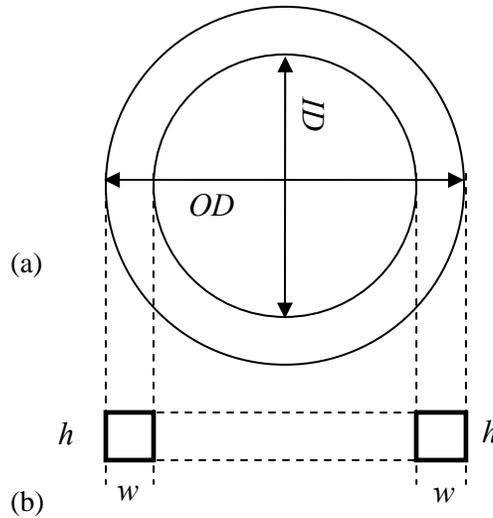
Geometry of toroidal core. (a) Top view, (b) cross-sectional view.
